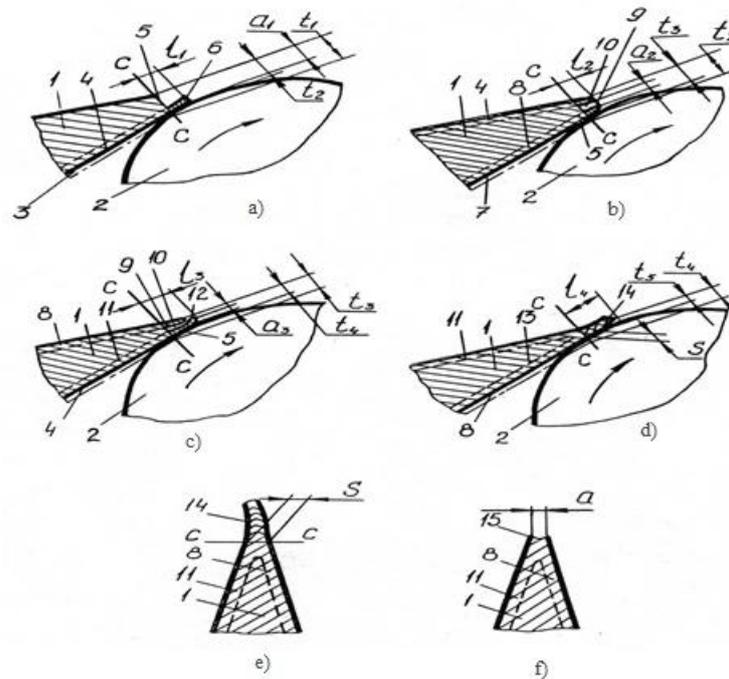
Formation of the cutting edge in multi-pass grinding chamfers blade
